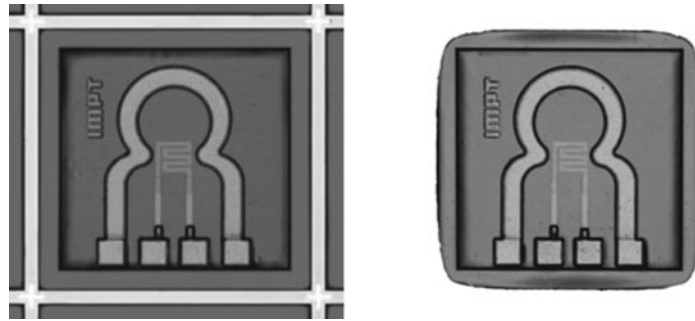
Sensor fixed to the silicon frame and after the stamping process.
